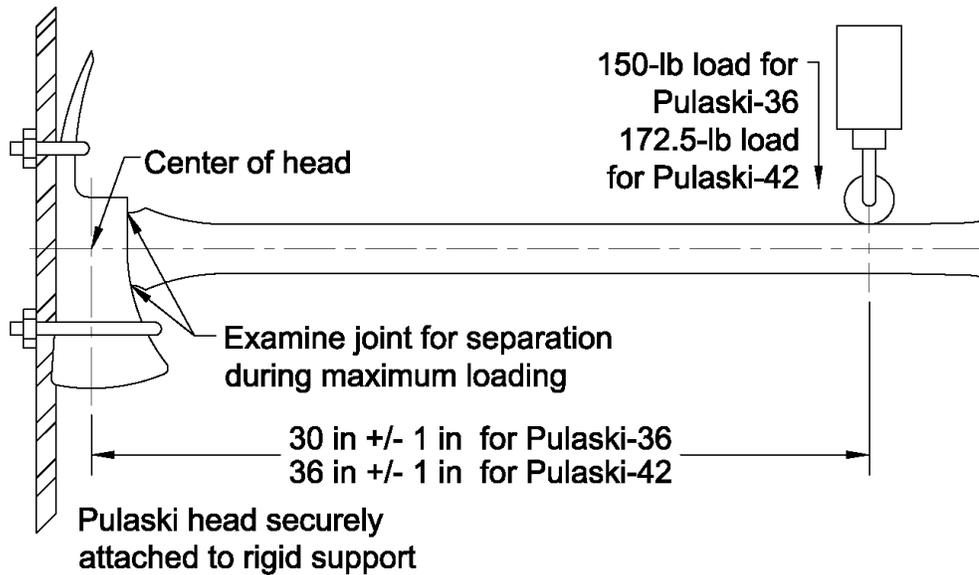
Second suggested method for applying the required moment loading for a clockwise load—compressive loading with test machine.
